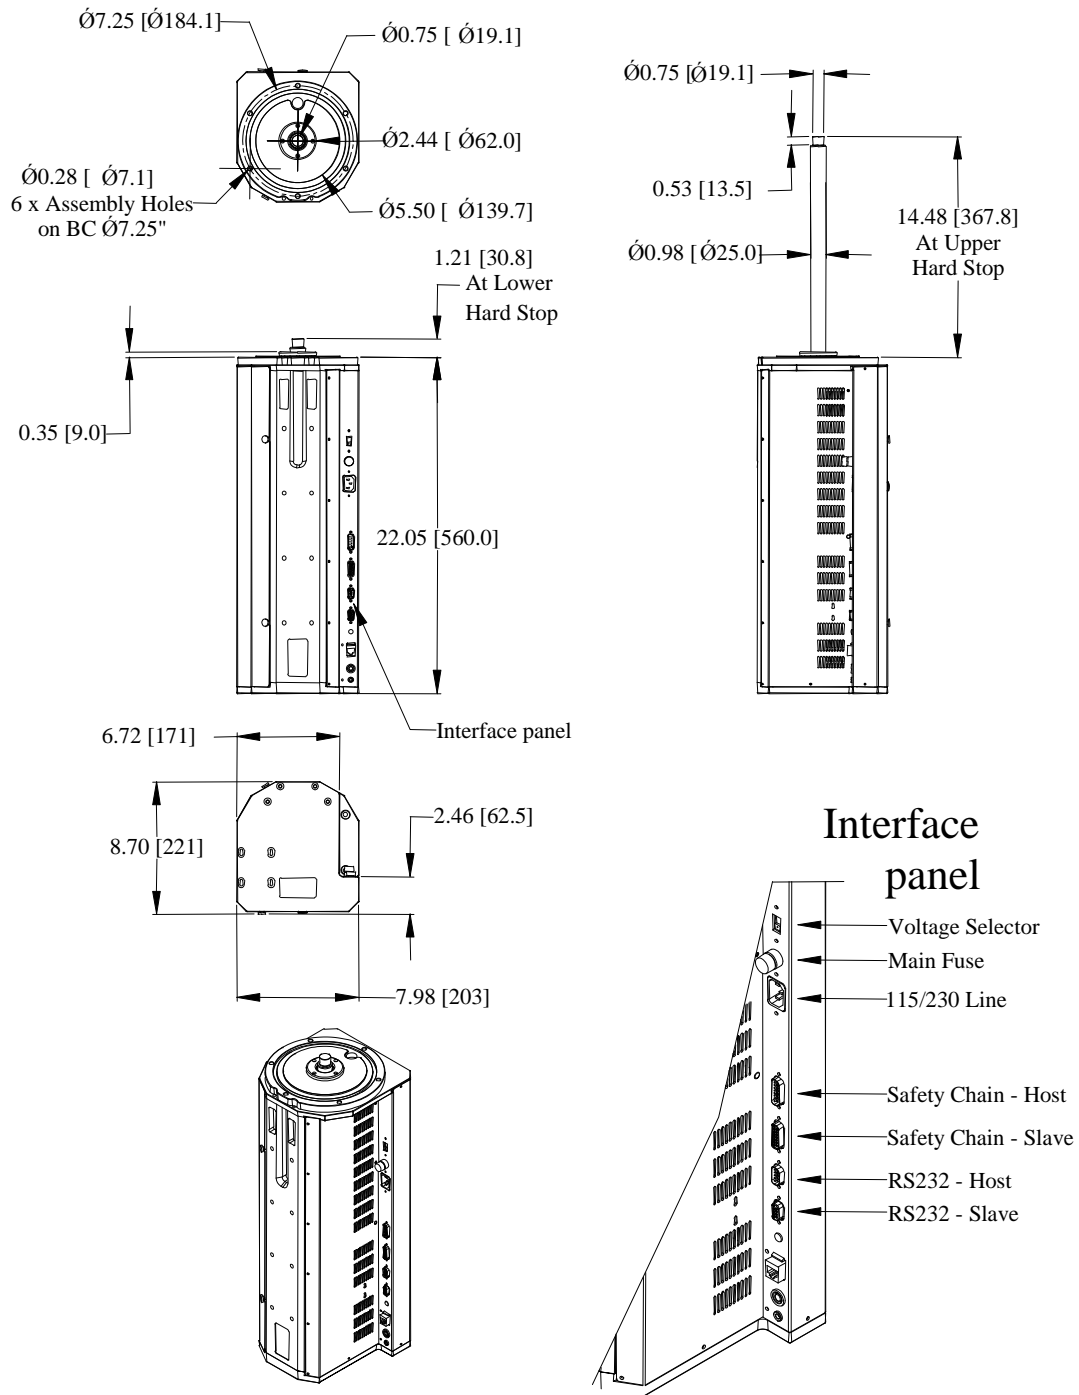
DIAMOND E5 Vacuum Elevator - Dimensions and Range of Motion
